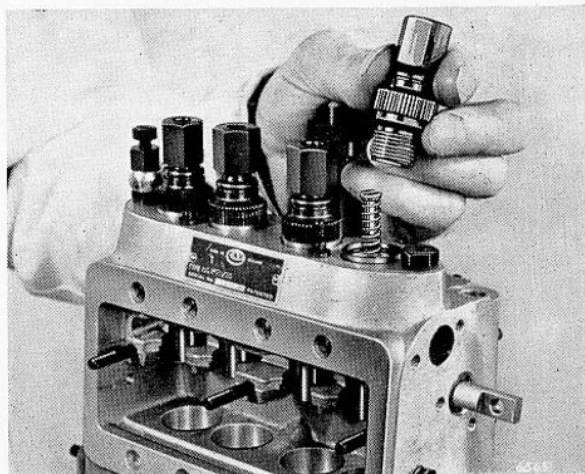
REMOVING THE DELIVERY VALVE HOLDERS
